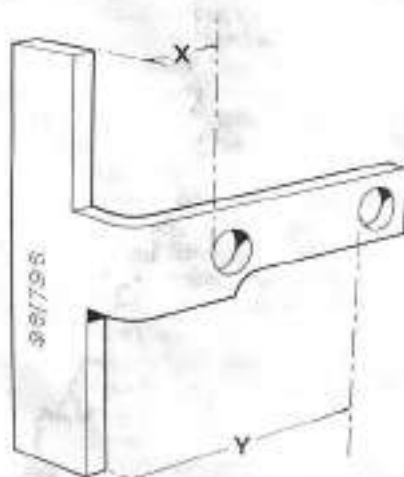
Adjusting gage (David Brown part No. 961796) for hydraulic control mechanism. Dimension "X" is 0.437 inch; dimension "Y" is 1.580 inches.
